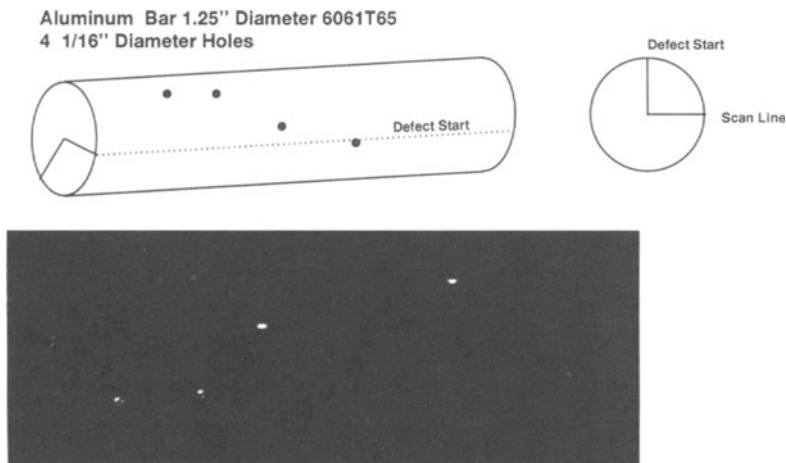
Laser ultrasound detection of surface defects on cylindrical aluminum sample. Defects are breaking holes.
